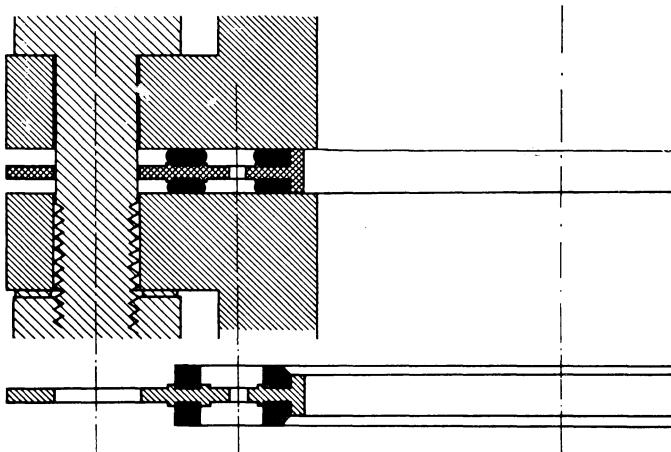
Dumbbell gasket seal (*Courtesy of Vacuum Research Company^{1253a}*)
